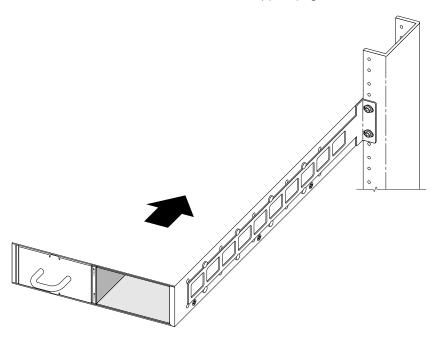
Sliding the Switch onto the Rear Mounting Brackets
